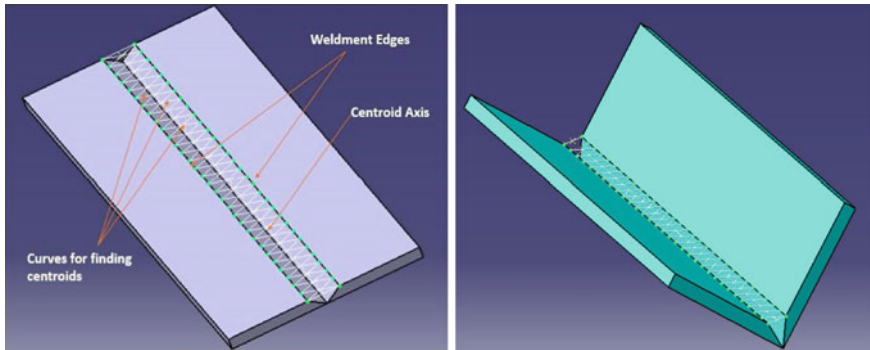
Sewing technique to find seam path for plate and L-Joint
